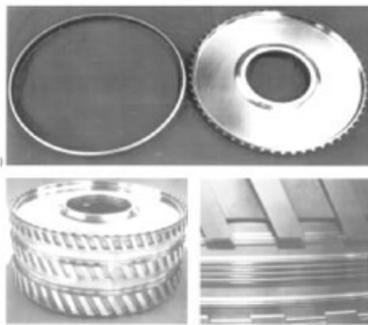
Compressor assembly with zoomed electron beam weld [2].
